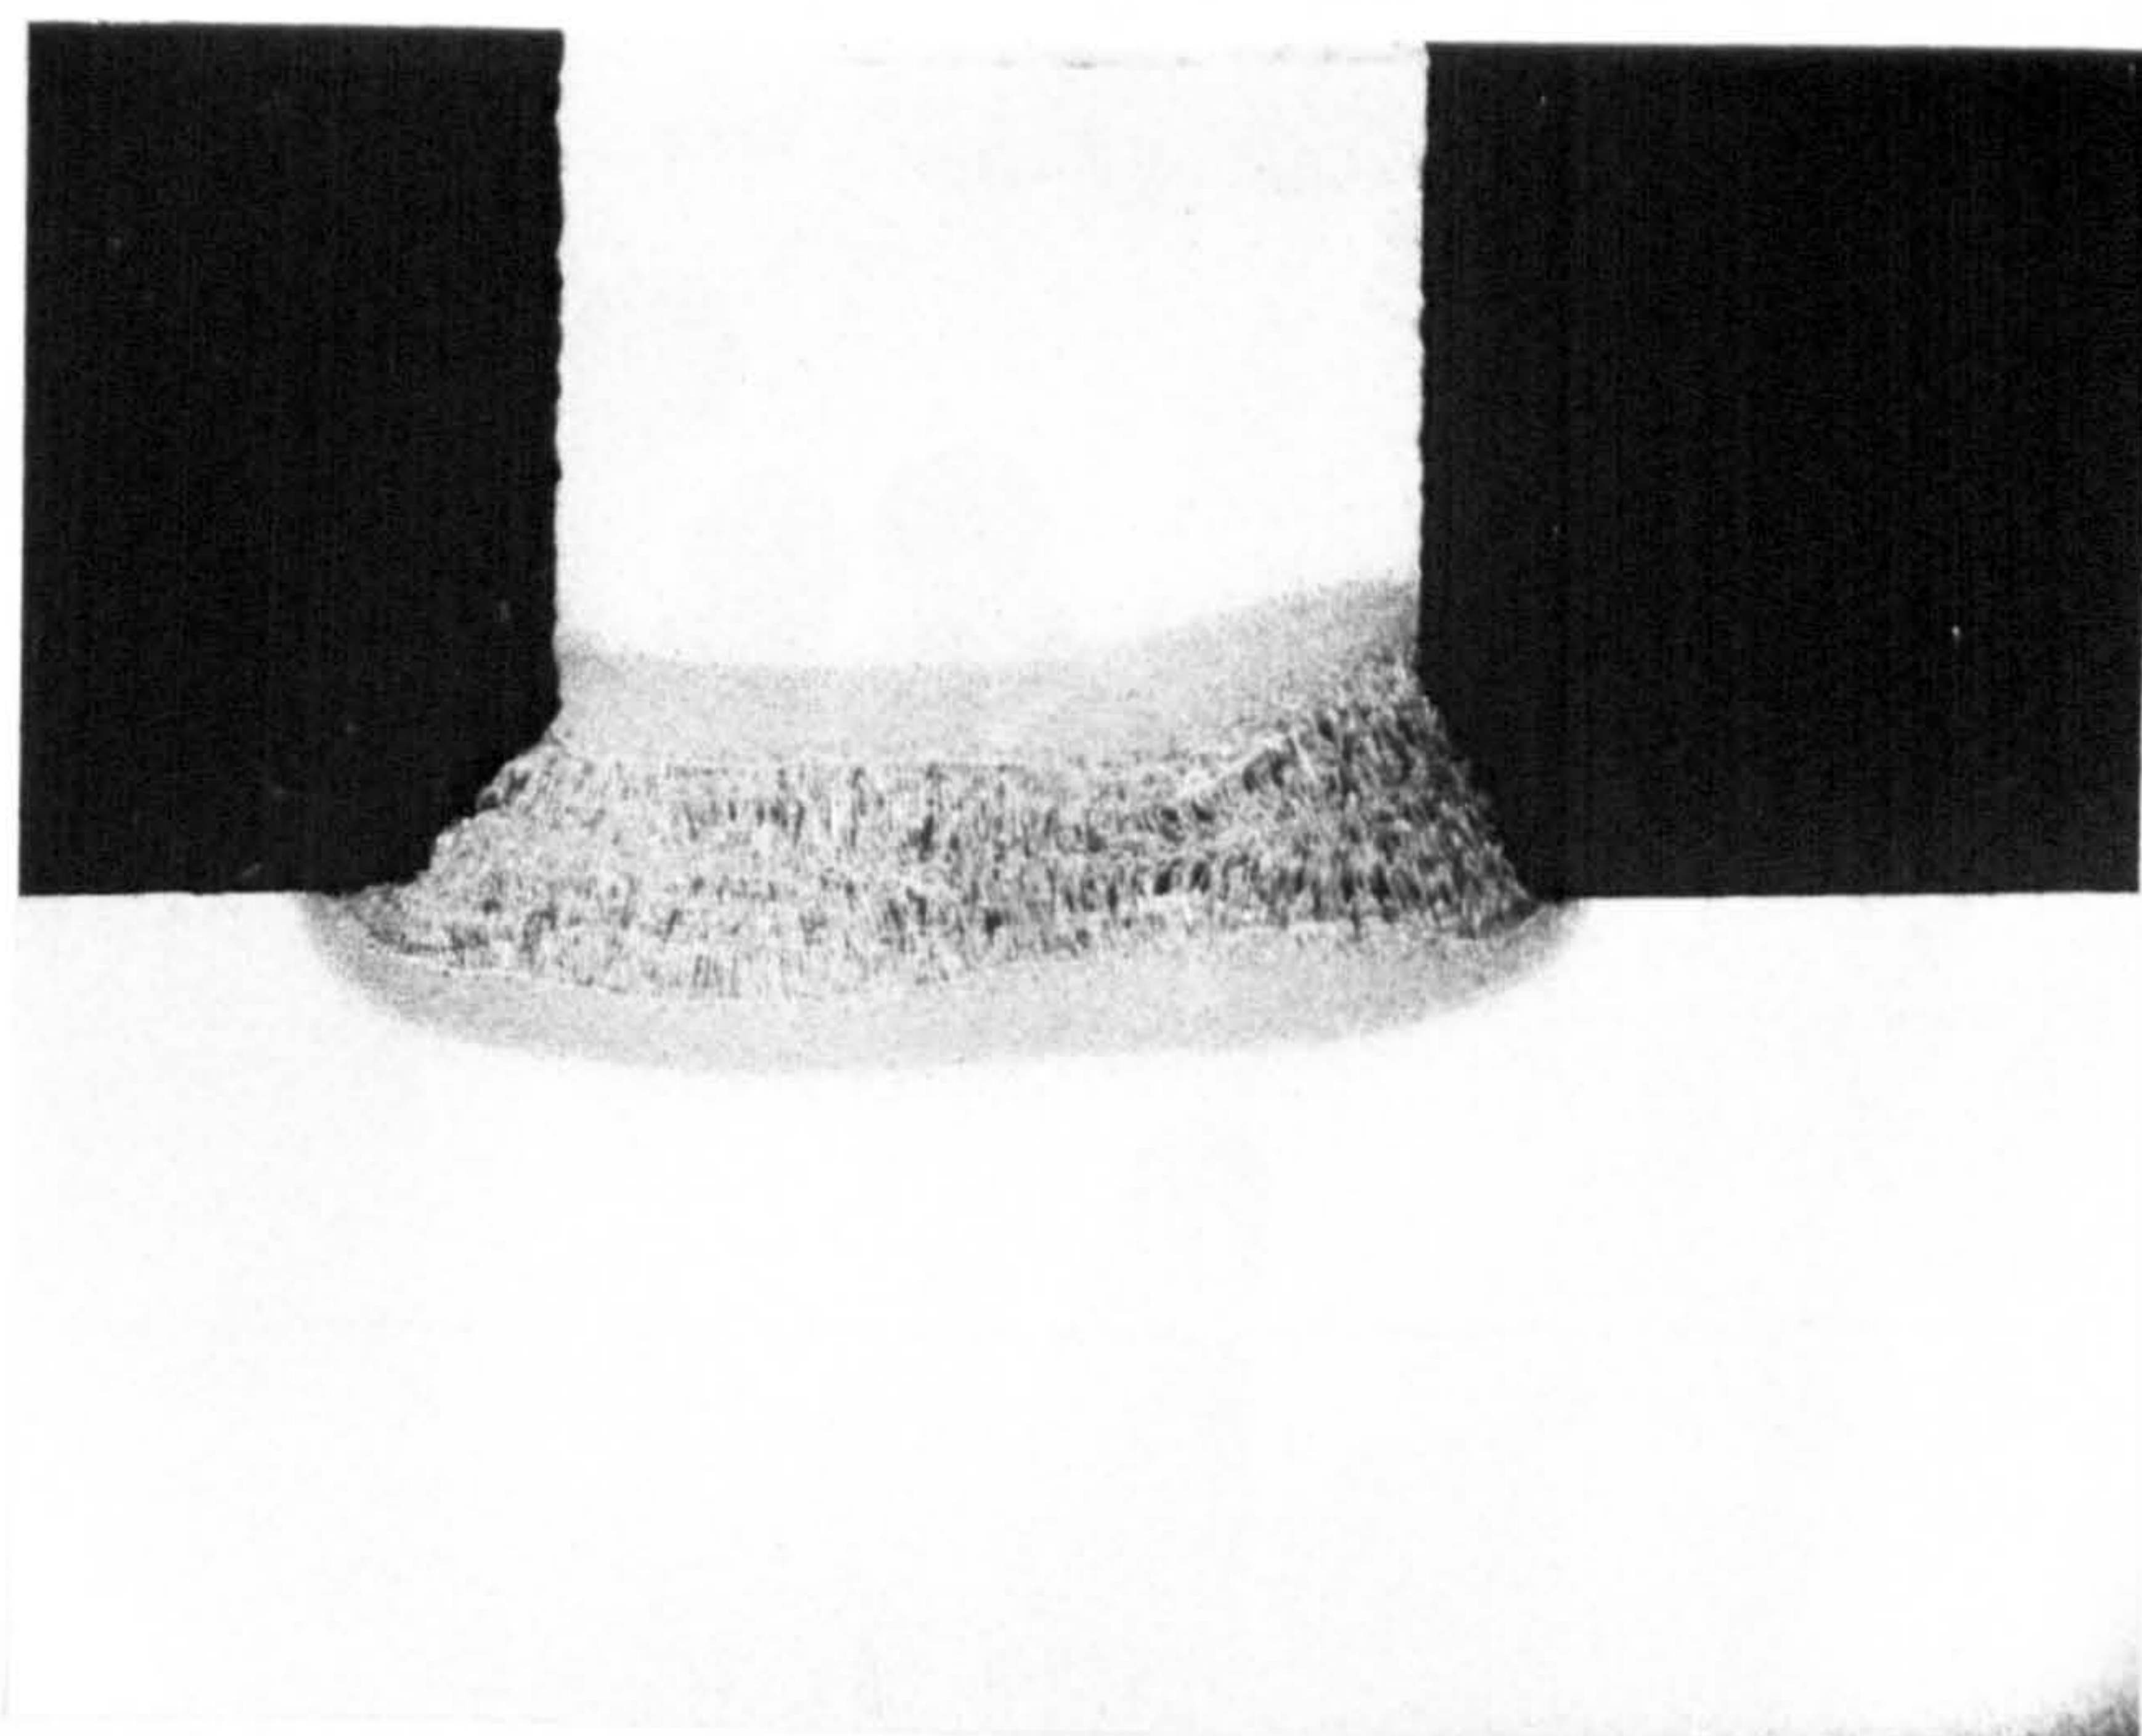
Macrophoto (x4.8) of a skid weld in 10mm thick plate (power = 9kW)
